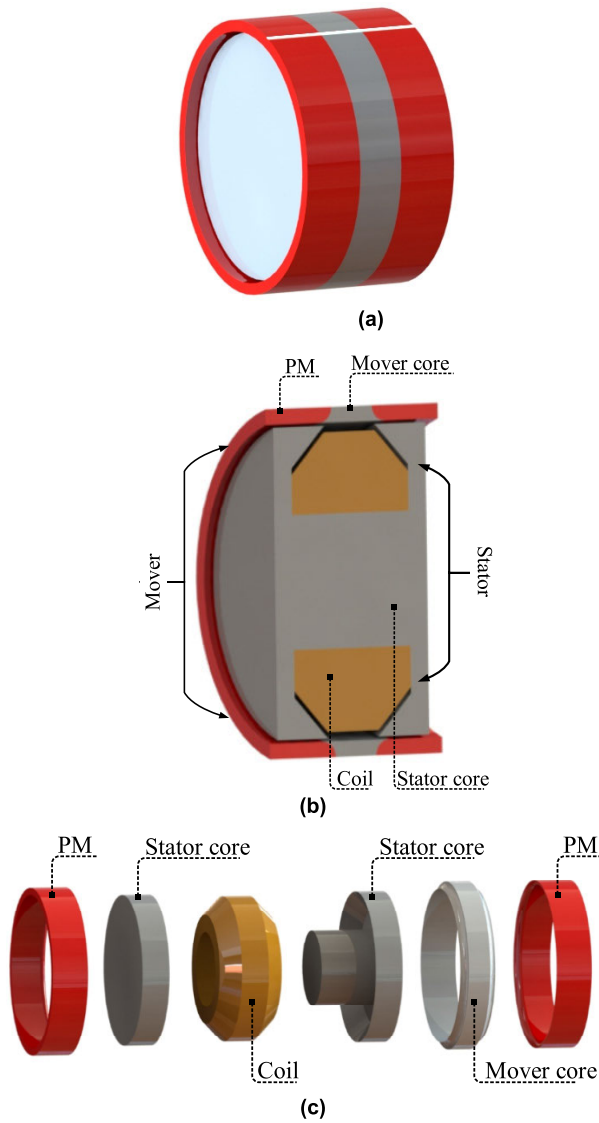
CAD model of proposed LOA (a) Full view (b) Section view (c) Exploded view.
